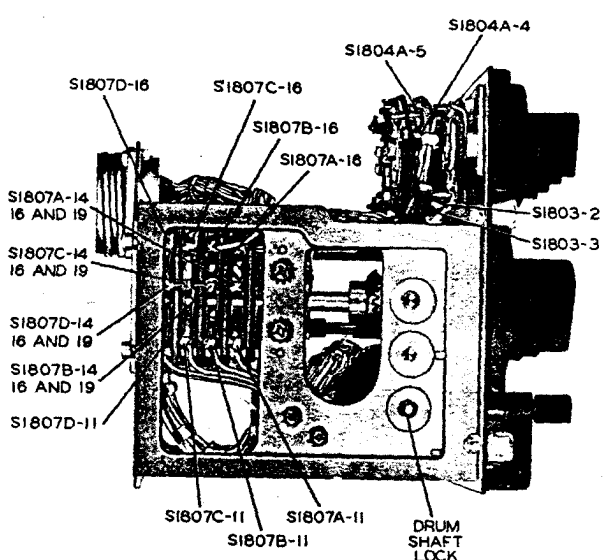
Radio Set Control C-1607, ARC-52, Left Side View, Cover Removed
